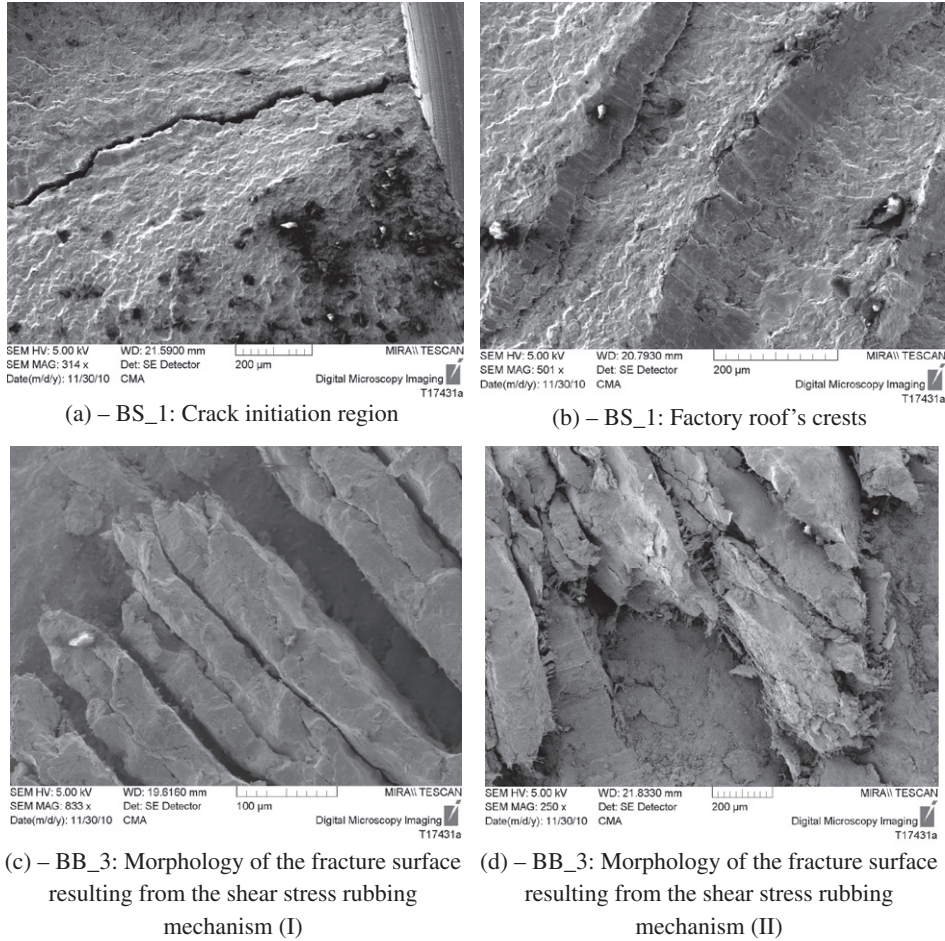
Fracture surfaces investigated with a scanning electron microscope.
